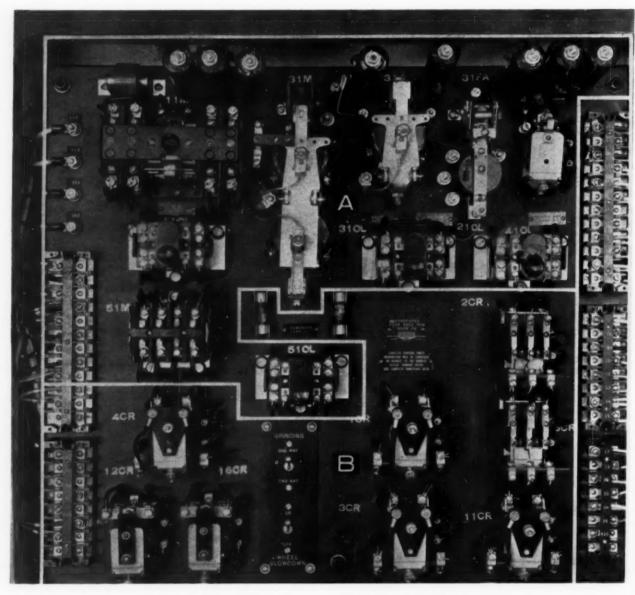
STANDARD CONTROL PANEL FOR 6 X 36 THREAD GRINDER
